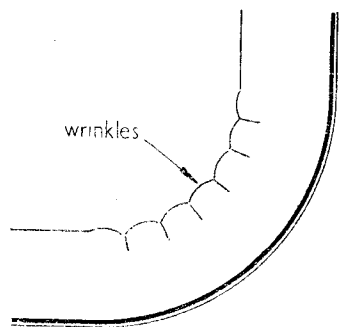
Showing deformation of pipe wall resulting from over-bending
